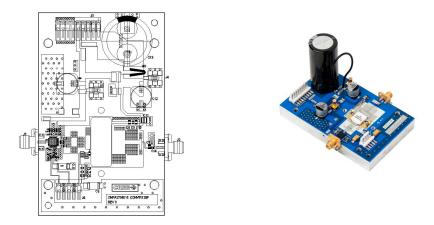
CGHV35120F-AMP2 Demonstrator Printed Circuit Board Assembly
